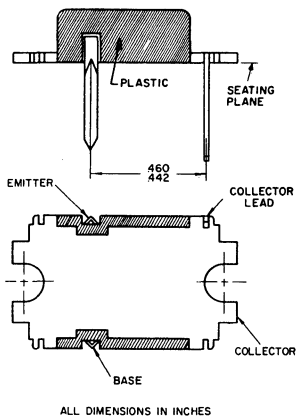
TO-219AA plastic transistor package designed for mounting on printed-circuit boards.
